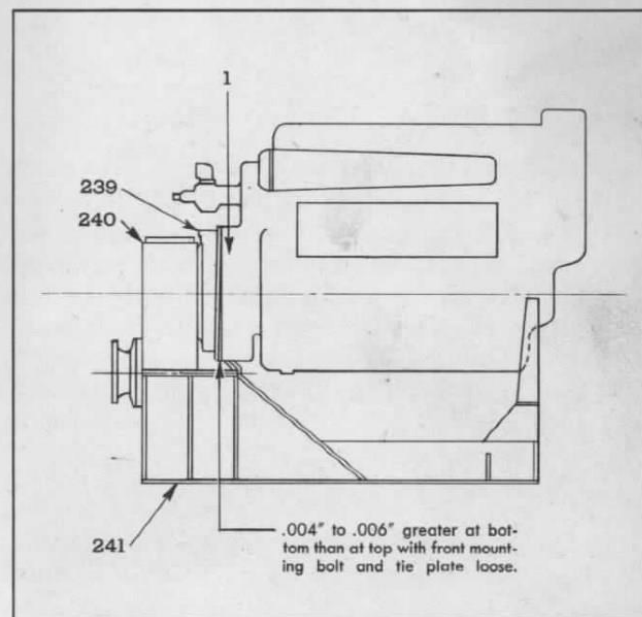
Alignment Between Engine Flywheel and Hydraulic Reverse Gear Housings on Twin or Quad Engine Units
